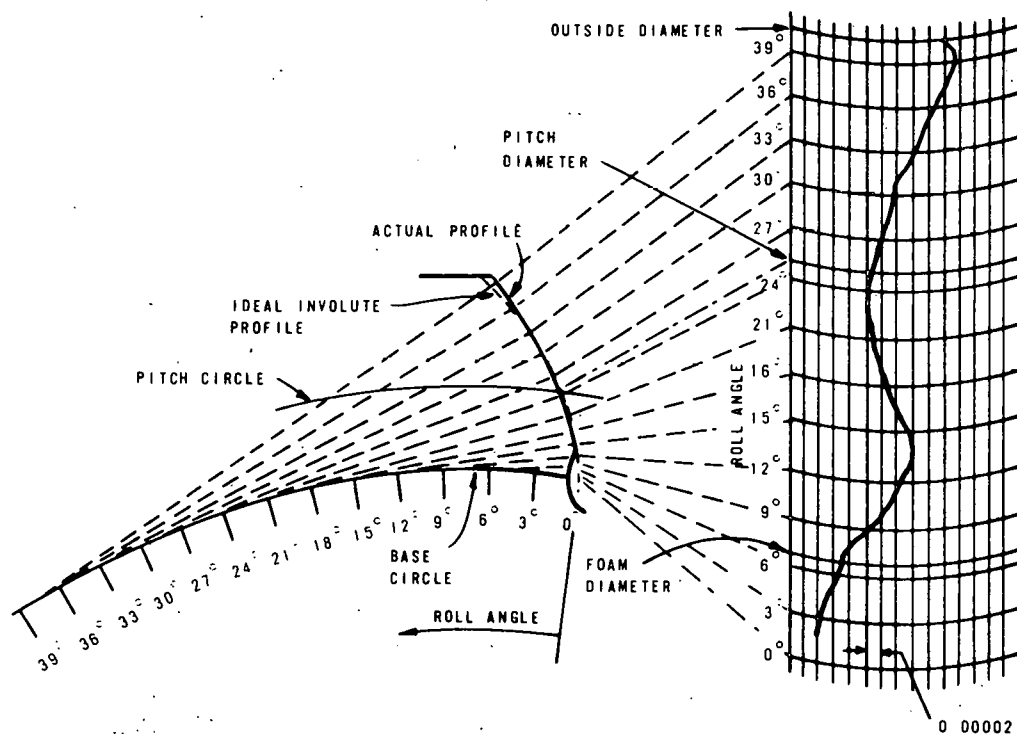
Profile Recording on Fellows 12-M Involute Machine
